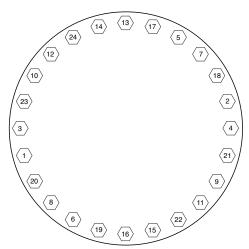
Cooler Head Recommended Bolt Torque Sequence
